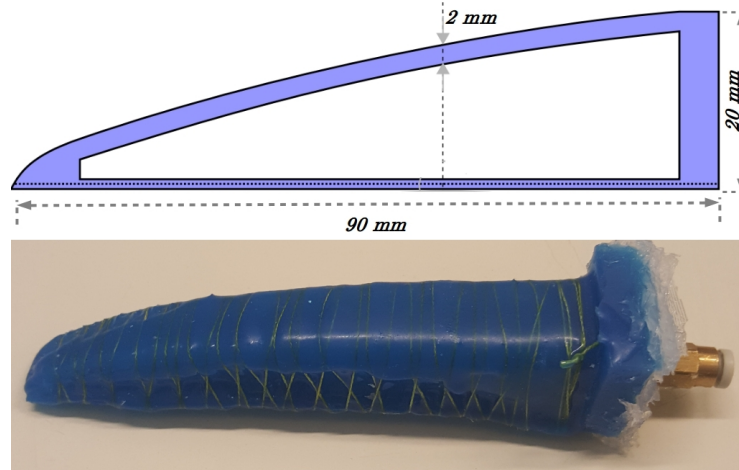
The top figure shows the mechanical drawing of the actuator (Source:[8]). The bottom figure shows the fabricated actuator.
